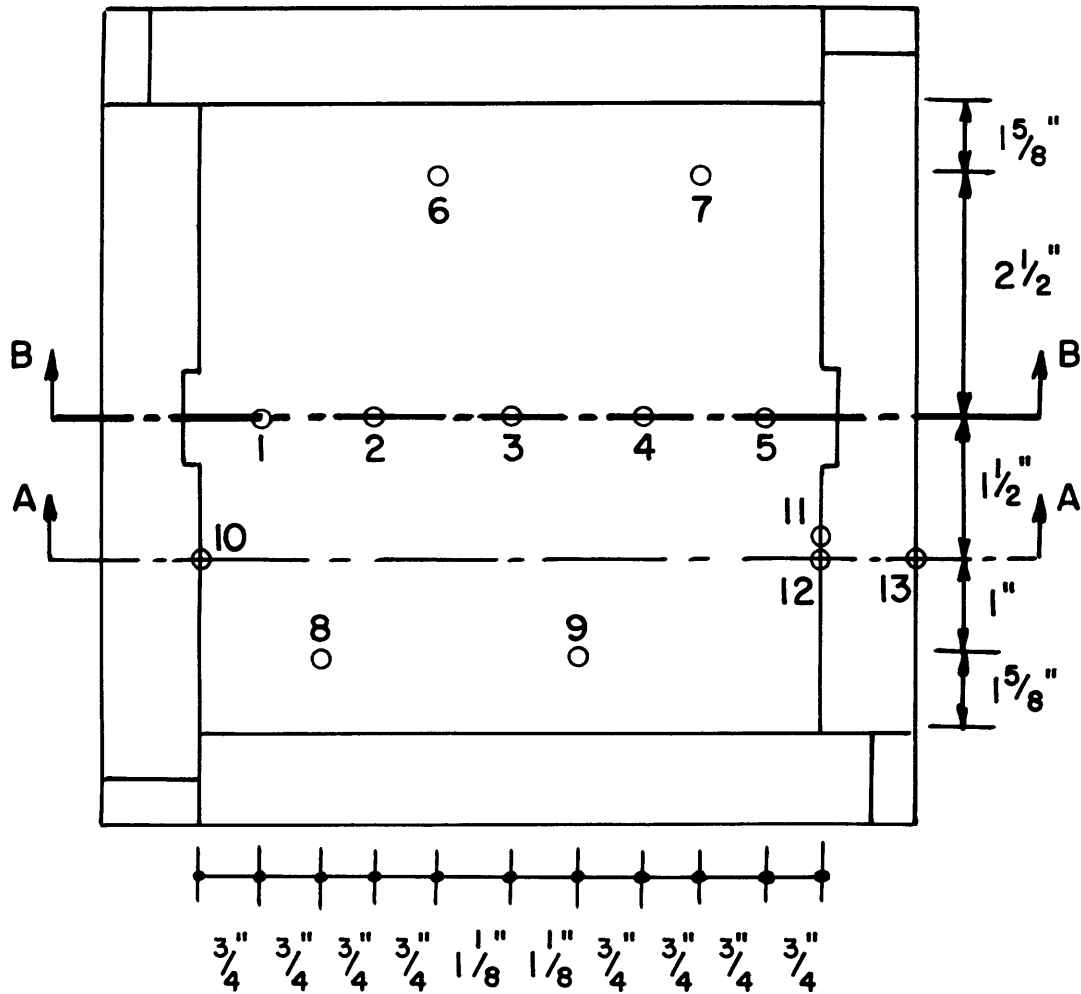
ASSEMBLY DRAWING OF TRAY
